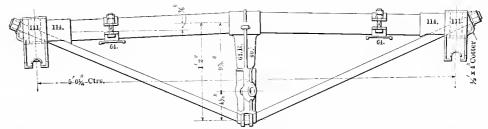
212-Inch National Hollow Double Brake Beam with Adjustable Heads for 4-Wheel Passenger Trucks.
